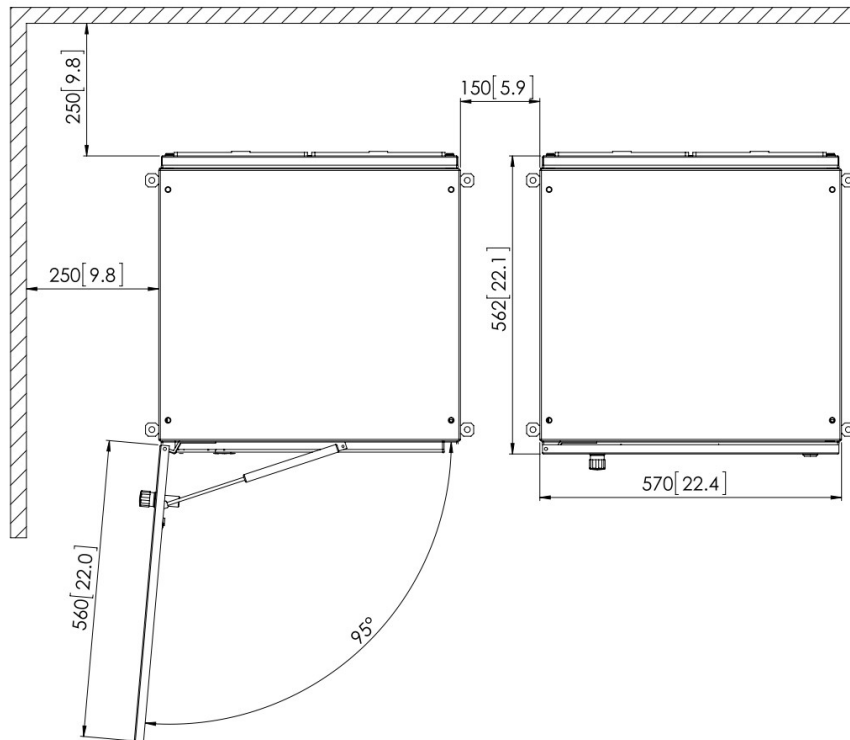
Foot Print & Spacing, Fixed Unit
